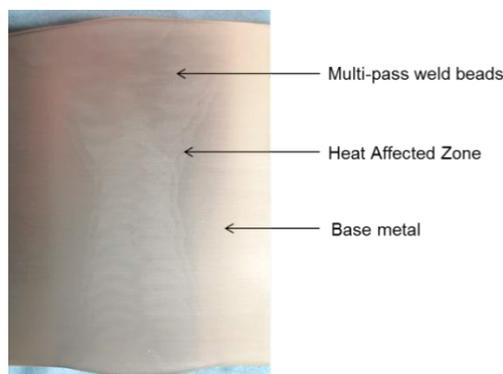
Cross-weld extracted slice after polishing and etching of the surface
